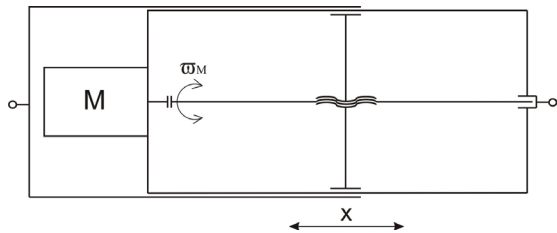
Kinematic scheme of the middle module of the in-pipe minimachine
